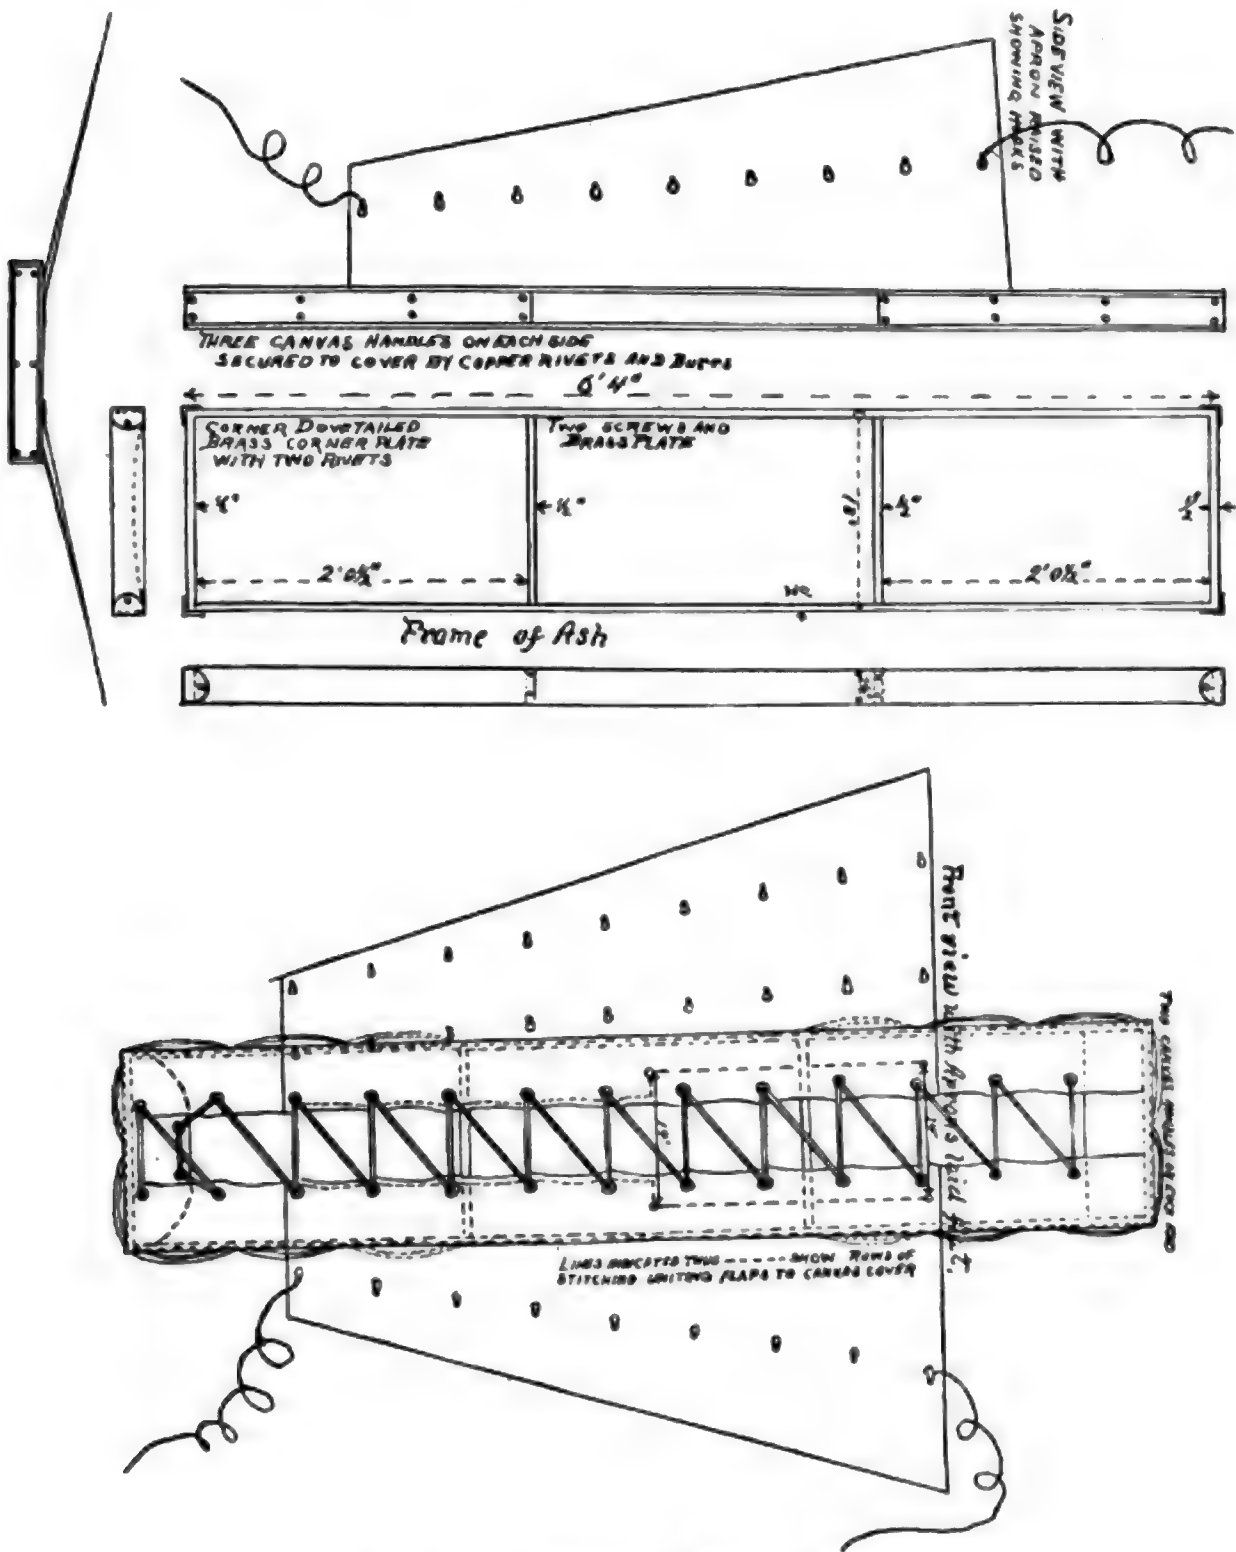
APRON STRETCHER, WORKING DRAWING.
